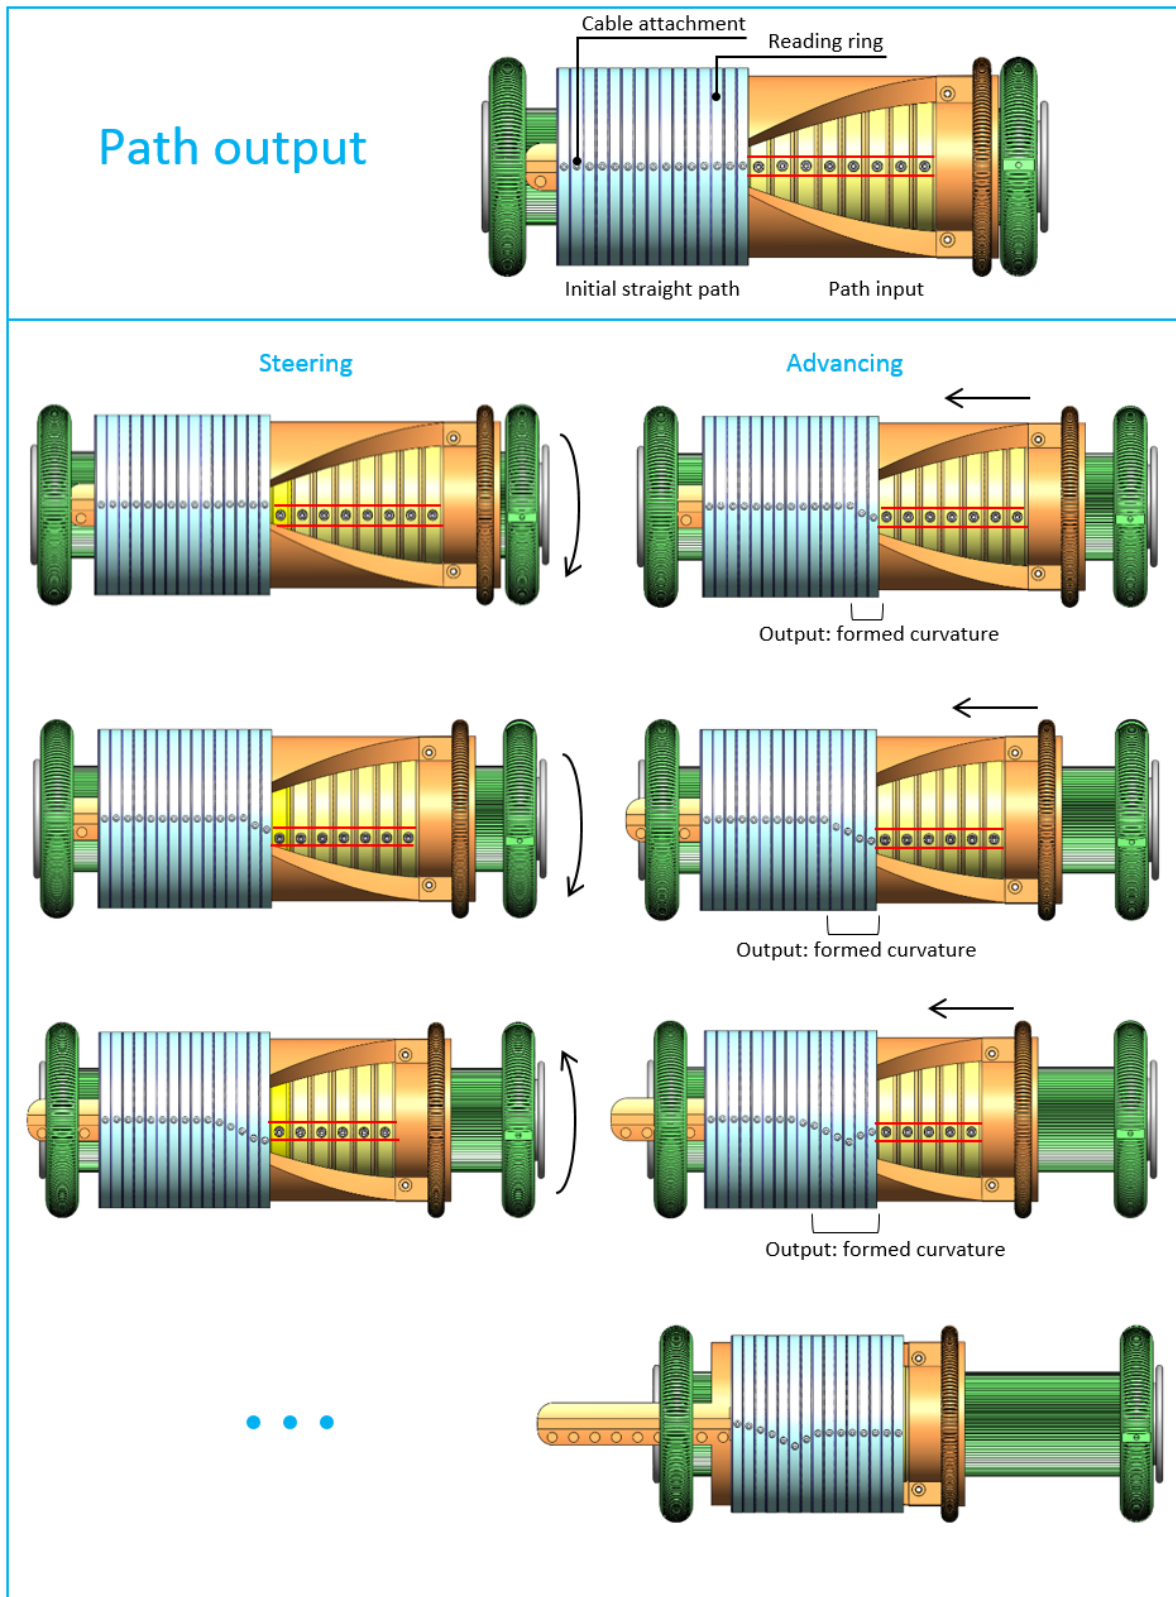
Working principle of creating a path output. Initially, the bearings of the reading rings are kept in a straight path by the translational motion mechanism. After steering and advancing the memory rings, the bearings of the reading rings are guided by the H-beam that forms the path of the memory rings.
